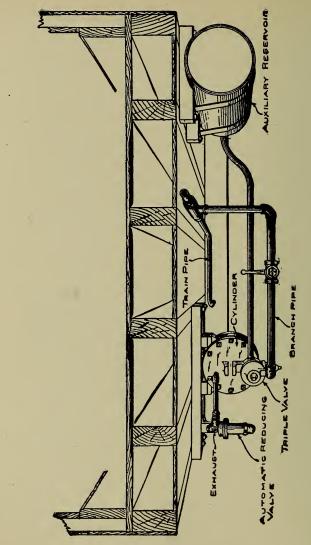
High-Speed Brake: Car Pipe Arrangement.
